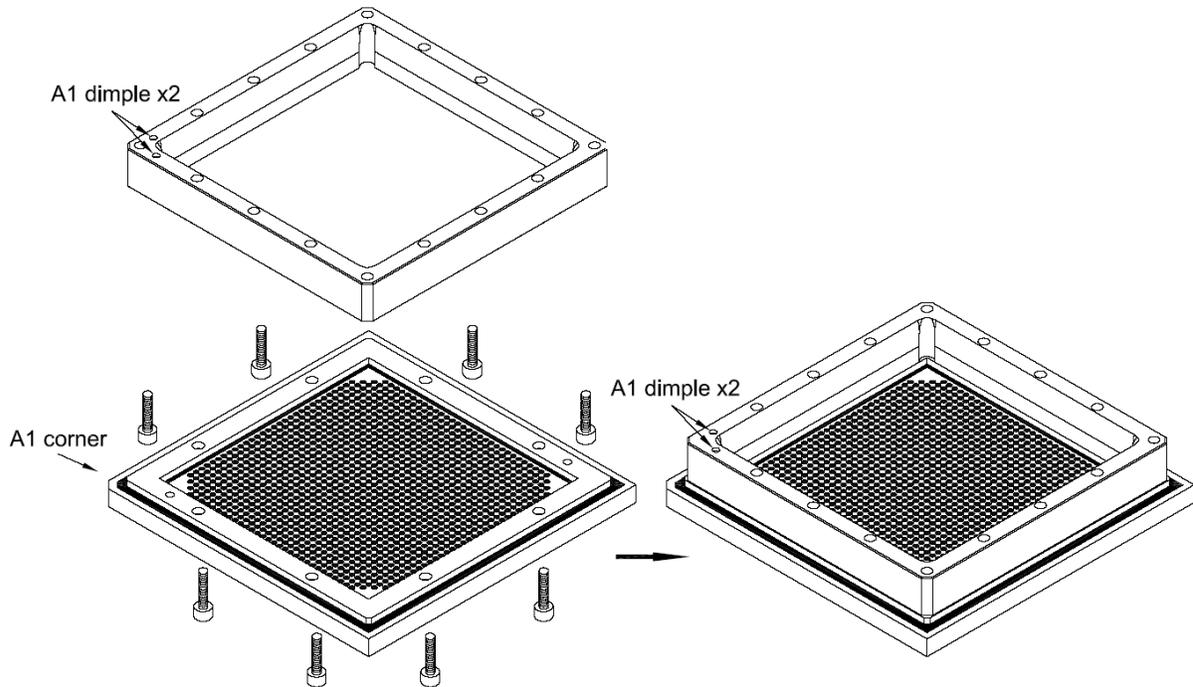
• Soldering Column Attachment to CG1272 to LG1272 Adapter
